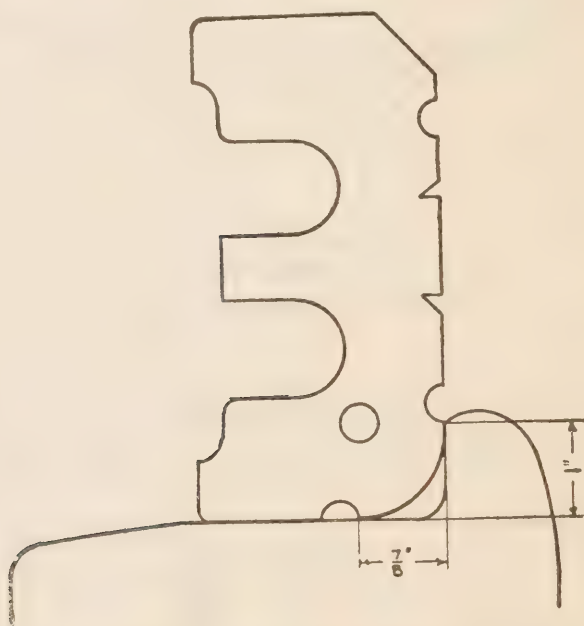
METHOD OF GAUGING WORN FLANGES
